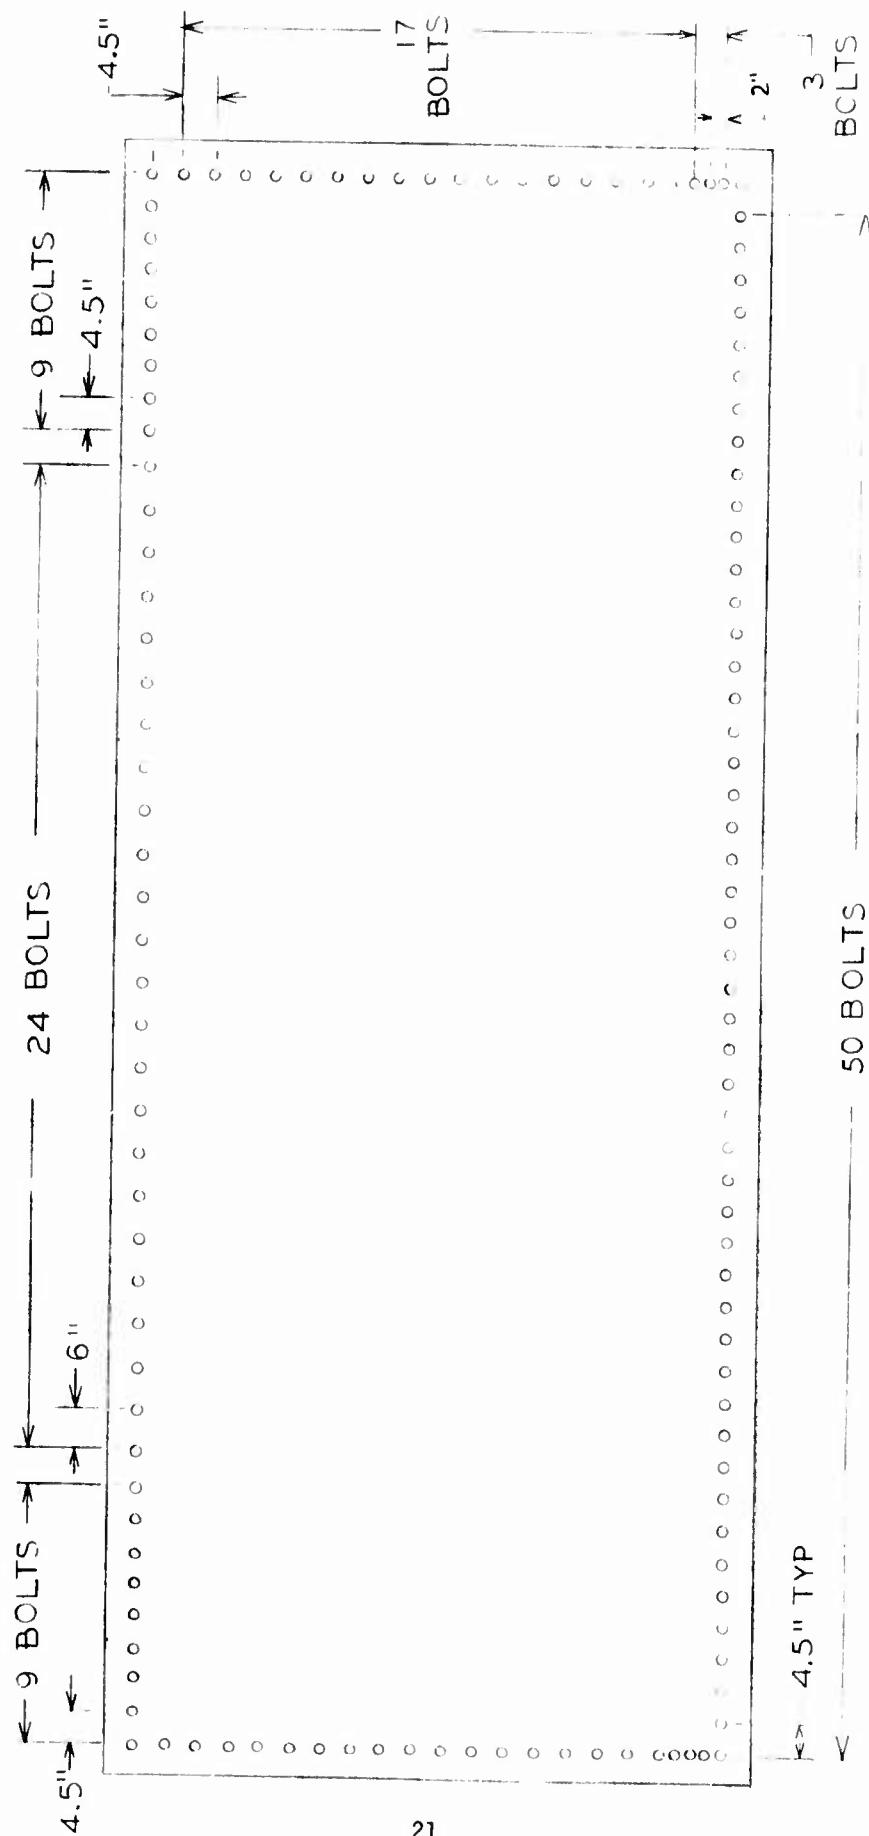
BOLT PATTERN USED ON F.R.P. CONTAINER WALL
